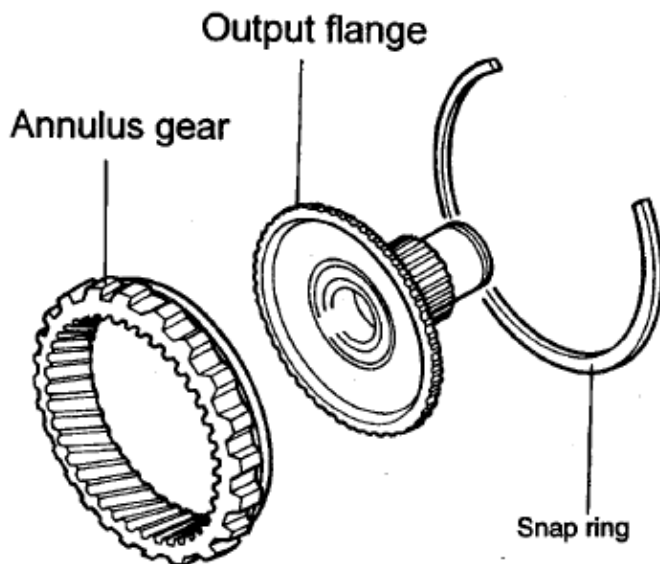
Identifying Annulus Gear & Output Flange With Snap Ring
